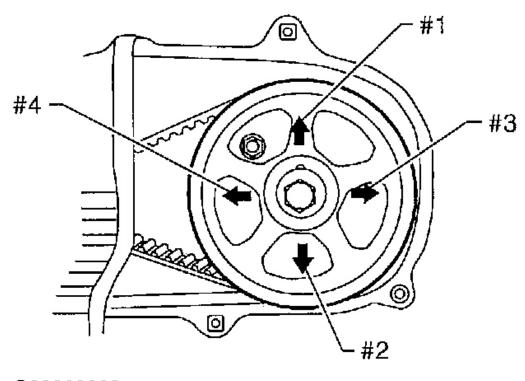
Measuring Intake/Exhaust Valve Clearance Courtesy of SUBARU OF AMERICA, INC.
